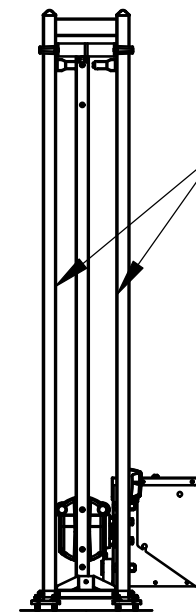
B - OPERATOR PORTAL PHOTOEYE CONDUIT
